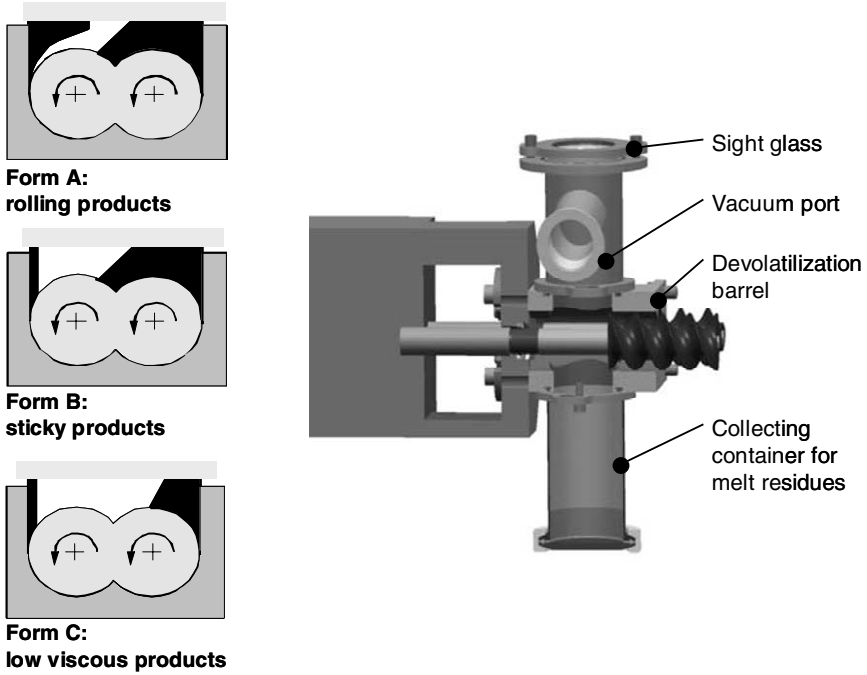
Inserts for ZSK venting (left) and side degassing ZS EG (right)
